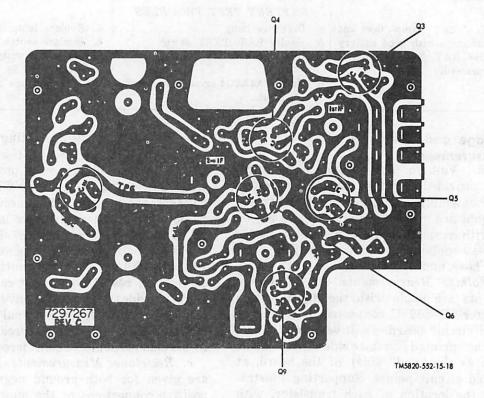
Voltage and resistance test points, receiver assembly A4A7A1A1 (lower board).
